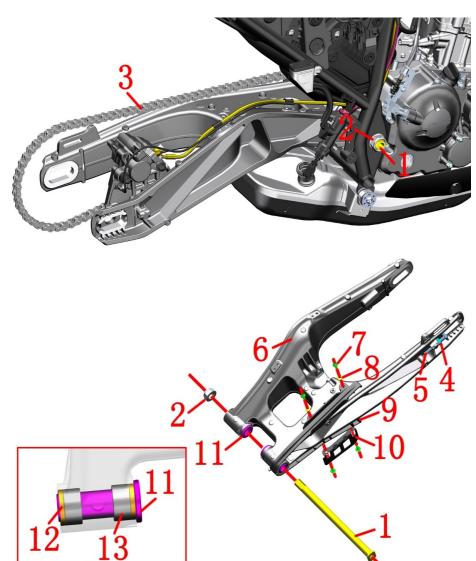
REAR WHELL COMPONENT		Rear swinging arm component	CHK	40)
